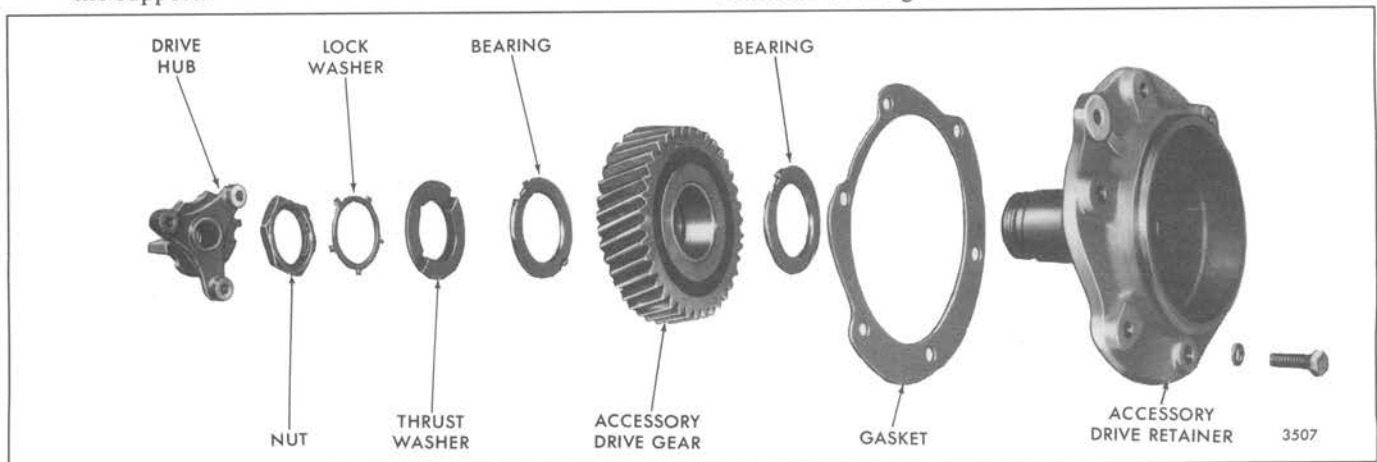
Accessory Drive Details and Relative Location of Parts
